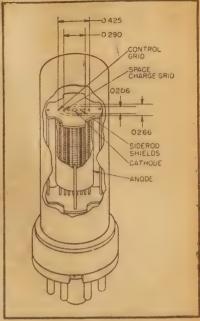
Experimental space-charge grid power output tetrode dimensions.
